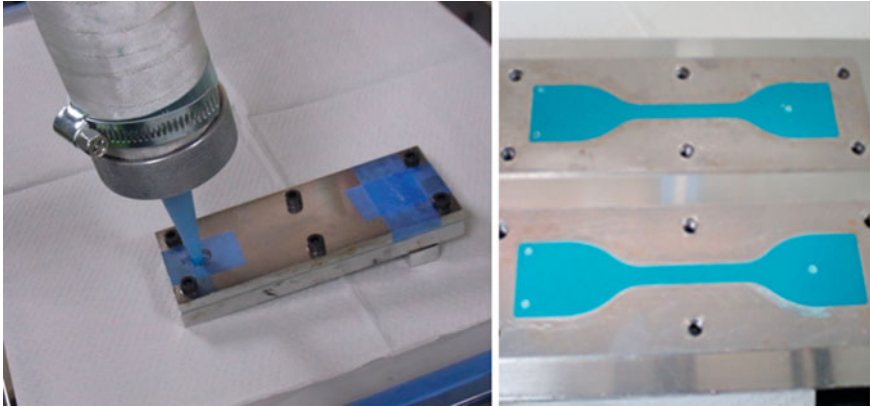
Injection of adhesive resin into moulds (*Left*: A mould and a pneumatic applicator with an electric heater, *Right*: specimen of cured adhesive in moulds)
